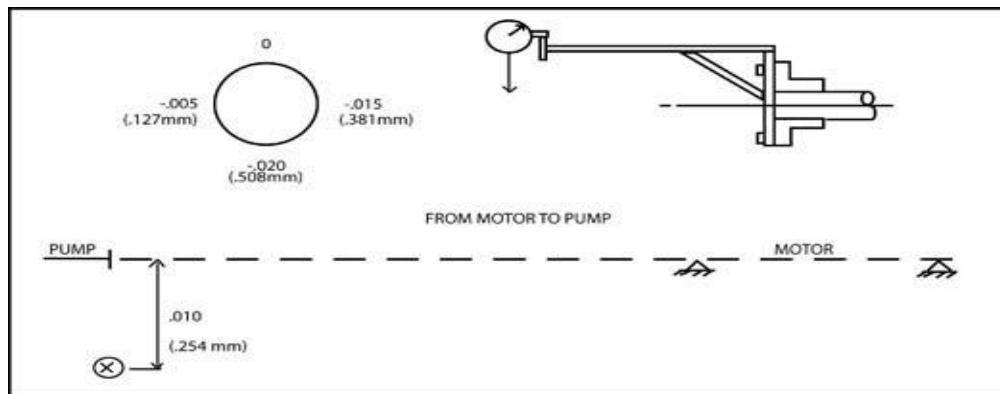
Motor shaft extension relative to the pump shaft center line.
